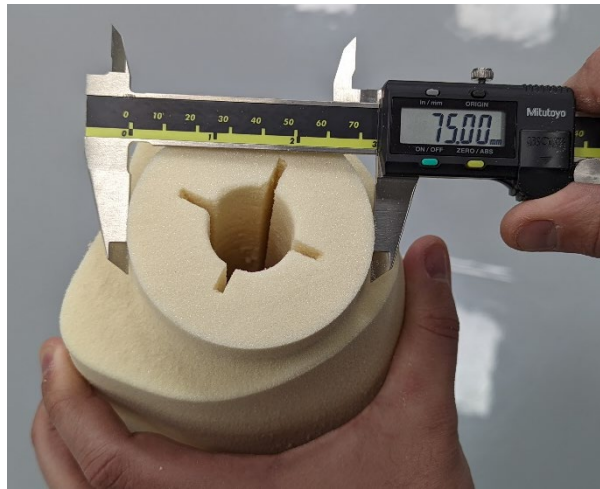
Finished Cylindrical Extension Sample Carve Tolerance
